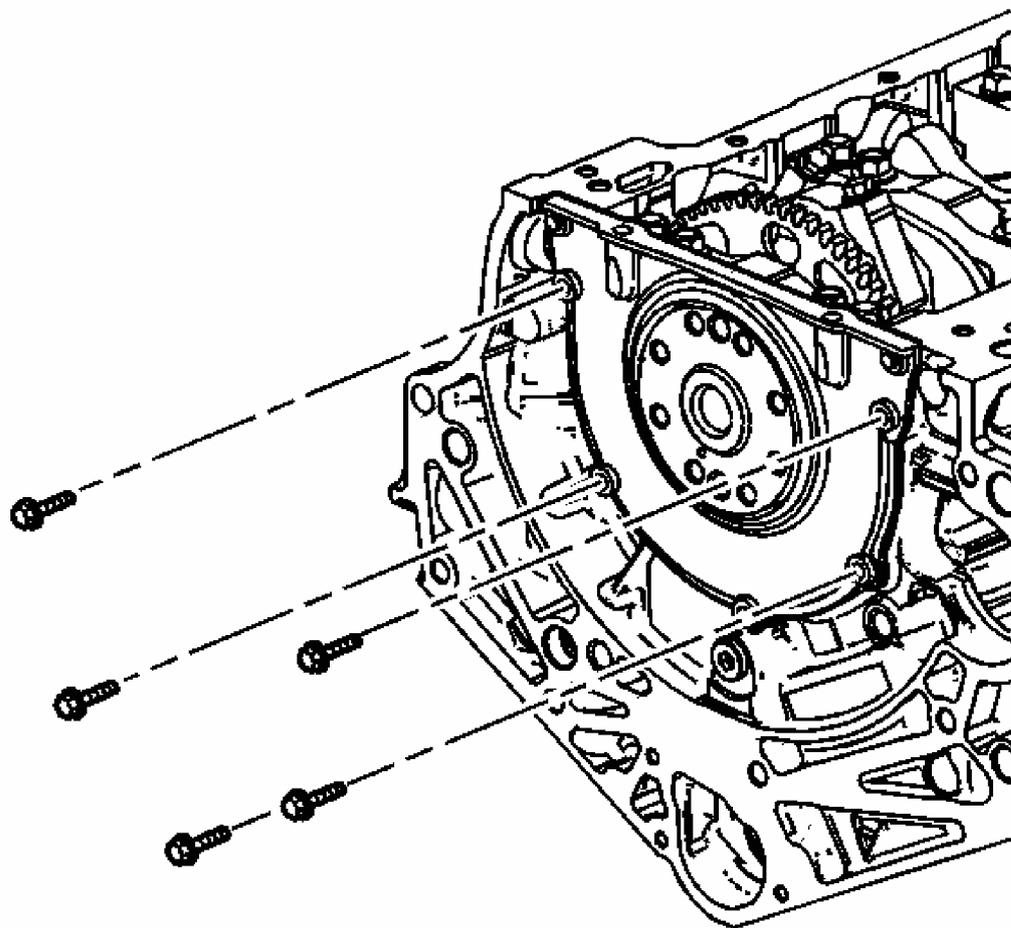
Locating Crankshaft Rear Oil Seal Housing Bolts
